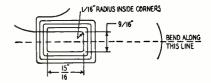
Winding details of the wobbler coils. Two identical windings as shown above are required. Spacing between turns in the drawing is only for clarification—coils are close-wound with No. 28 silk-covered wire and doped.
